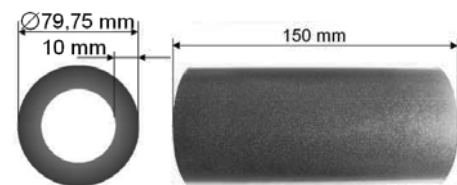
Specimen of gradient material (cured epoxy resin with hard coal filler) made by centrifugal casting method
